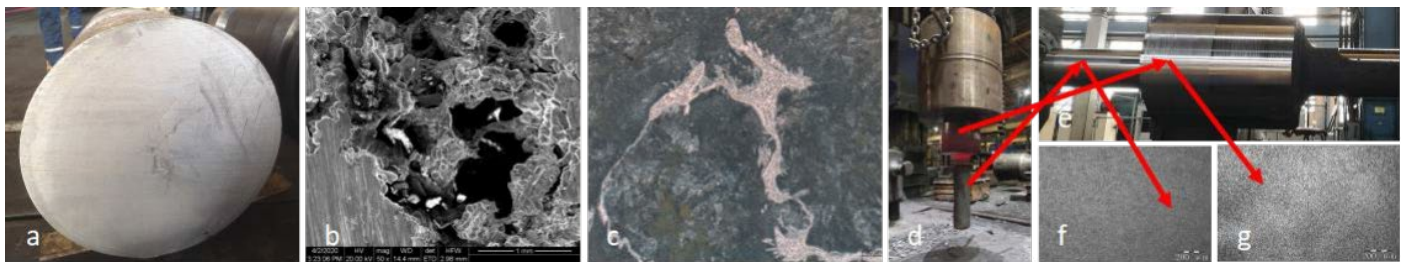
The engineering experiment of FGS forging for cold rolling work roll.
